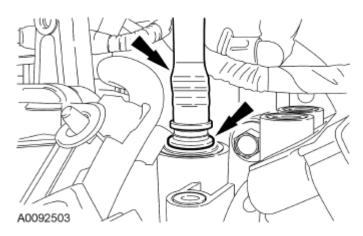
Locating Vacuum Hose And Quick Release Fitting Courtesy of FORD MOTOR CO.
